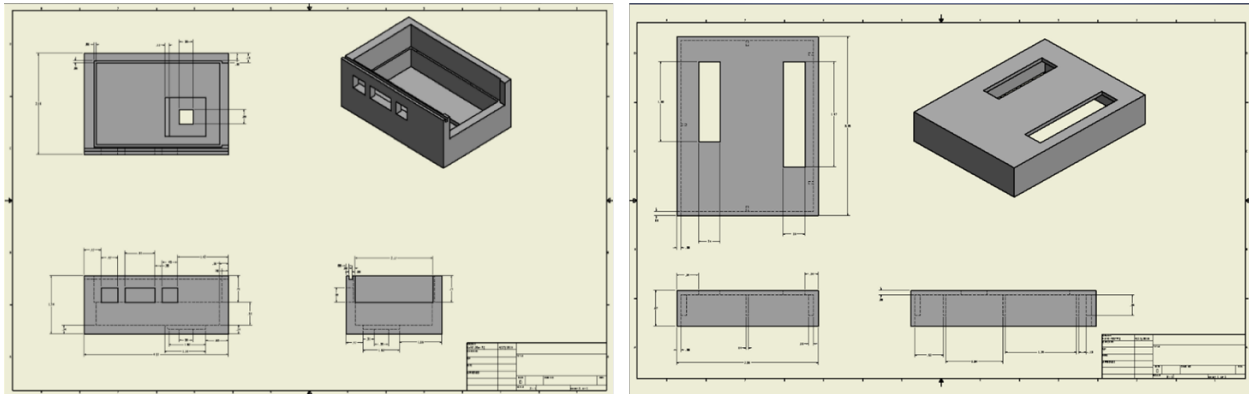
Housing Components: PCB Holder and Raspberry Pi Case Components¹⁸.
